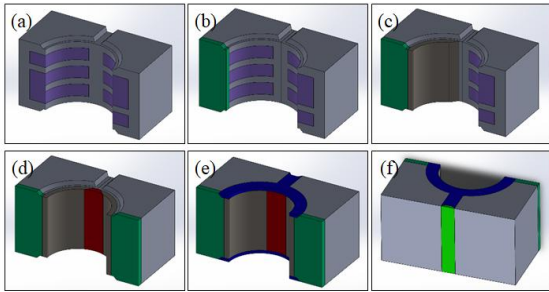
Procedure of DMT process for fabricating of test mold core: (a) Assembling machined mold core and coupon, (b) the front side deposition, (c) the cavity deposition, (d) the connect side deposition, (e) the upper and lower side deposition, and (f) the back side deposition
